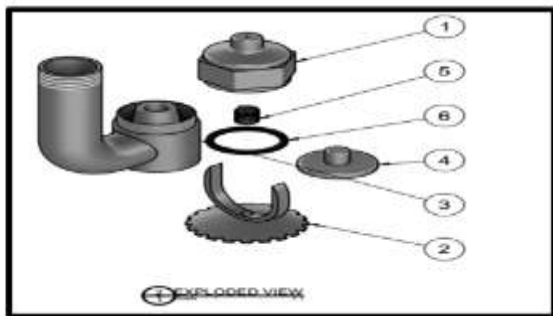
Exploded View of Isometric View of Vertical Design of Innovative SMA Fire Sprinkler
